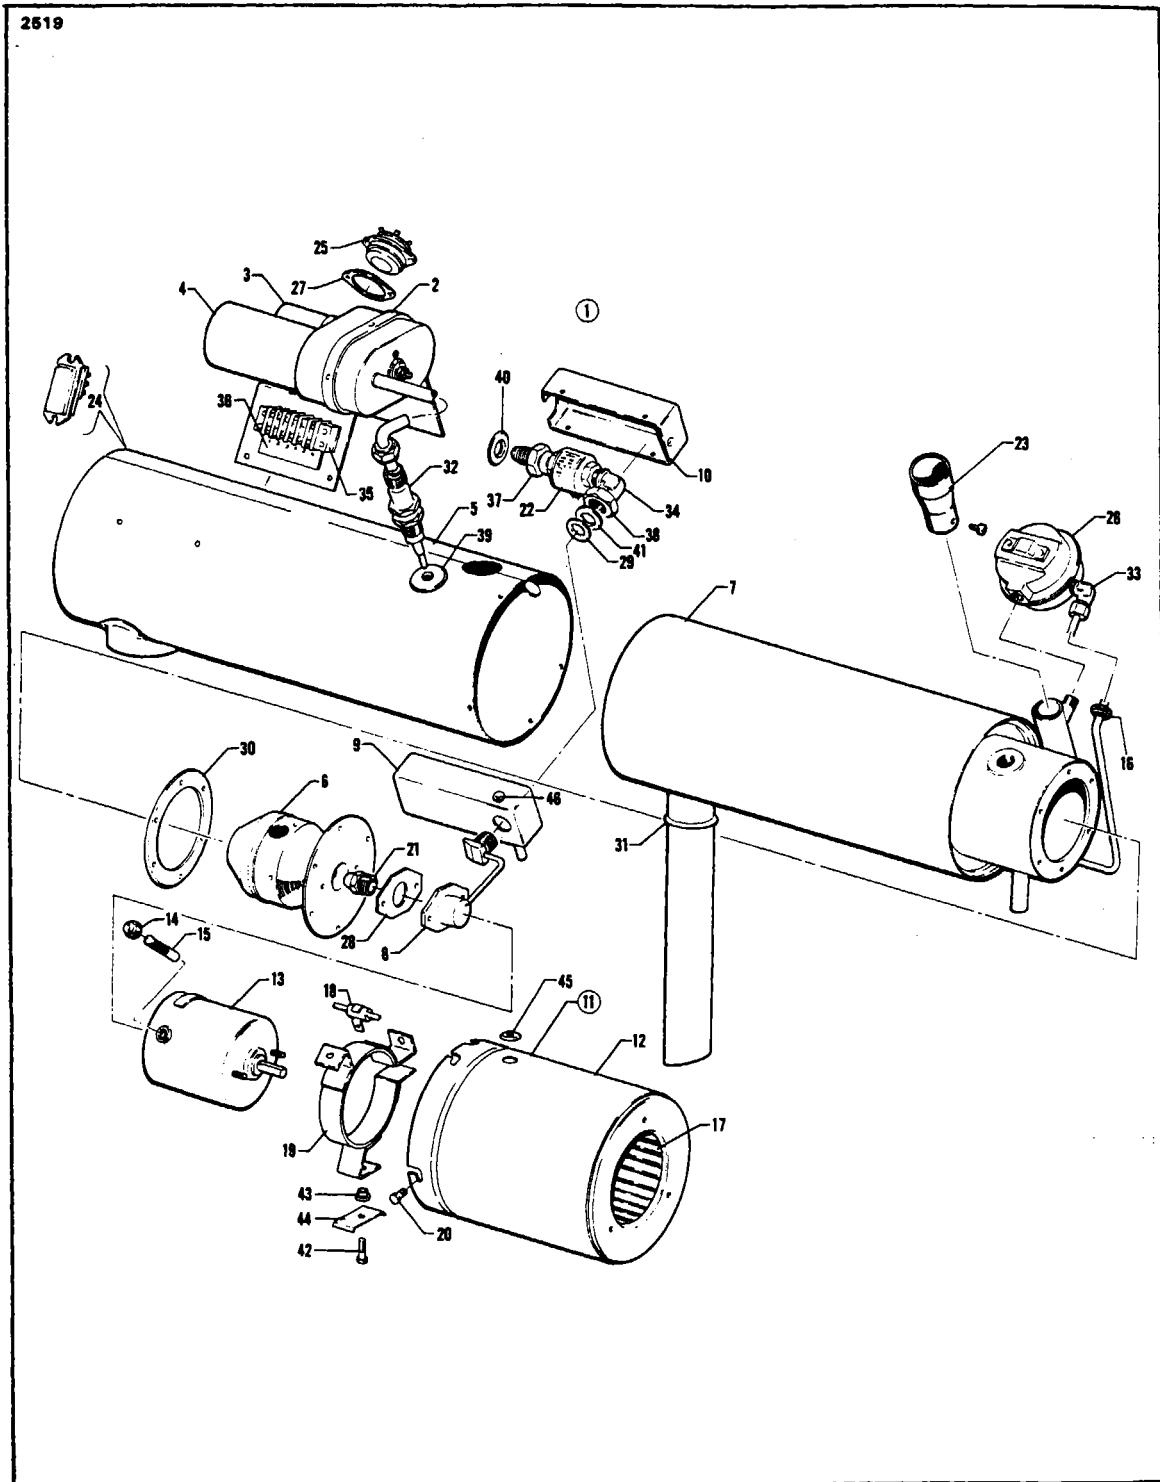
Exploded View of Heater Assembly No. 755 257 (28-Volt)
